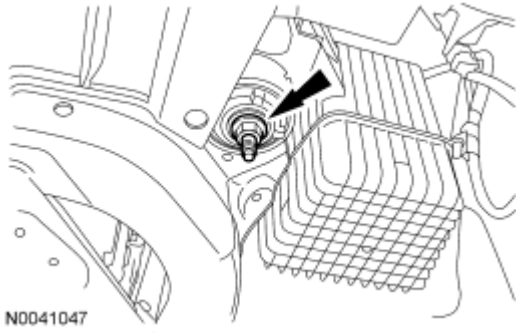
Locating EGR Tube Nut At RH Exhaust Manifold
